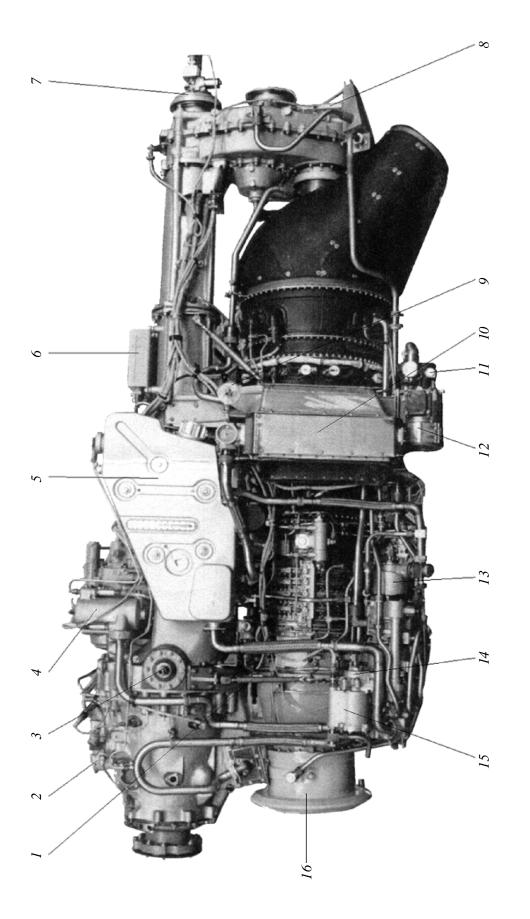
Left-side view of TB3-117BMA-C5M1 engine: *I* – Gas Generator Drive Attachment Rod; 2 – Torquemeter Oil Punp; 3 – Engine Attachment Trunnion; 4 – Oil Filter; 5 – Oil Tank;
